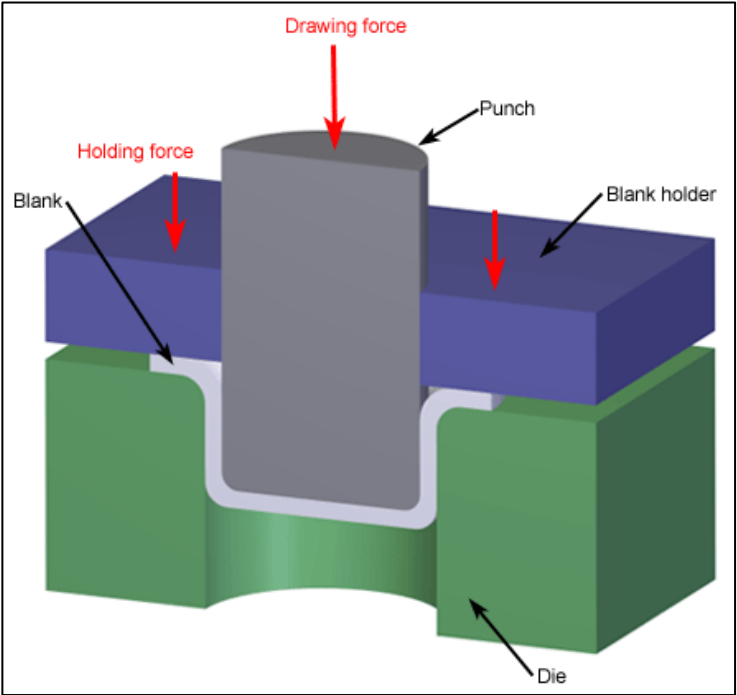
Deep drawing process [Custompartnet.com, 2018]
